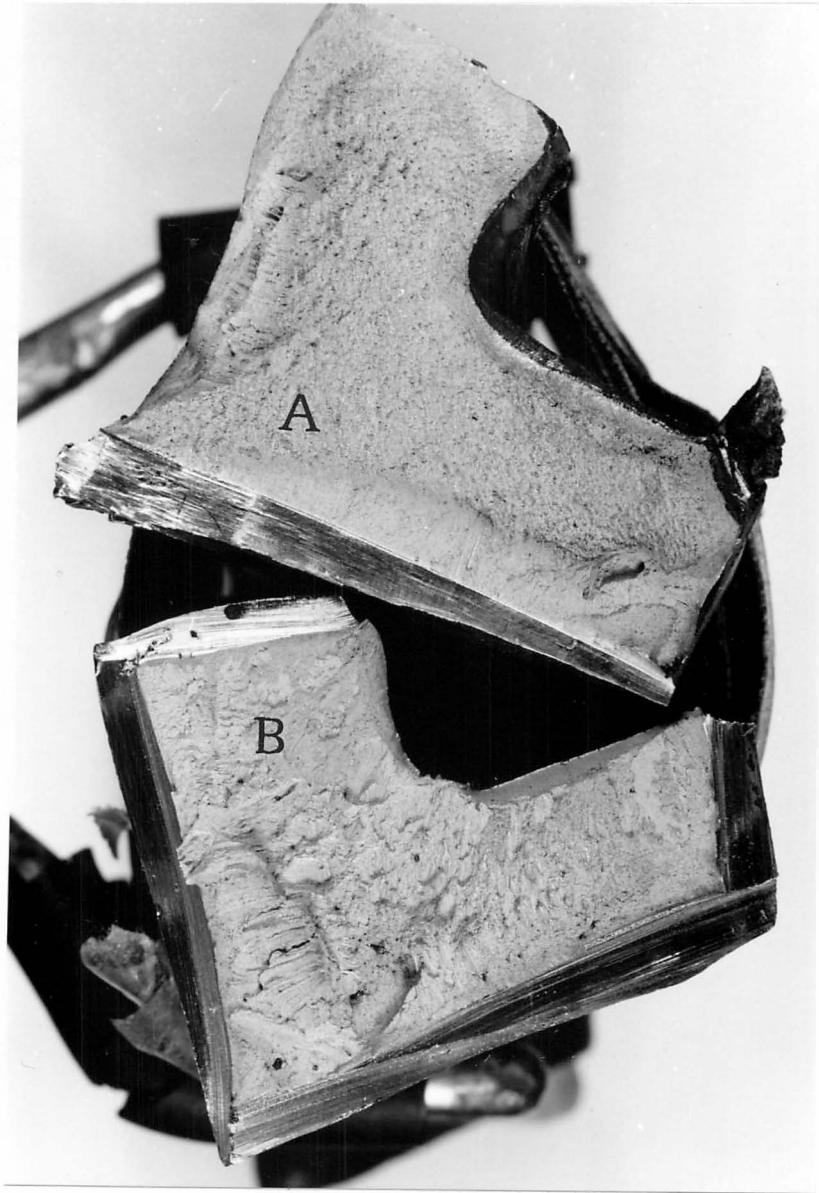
Fracture faces of two different flash welded joints made in N-155.
